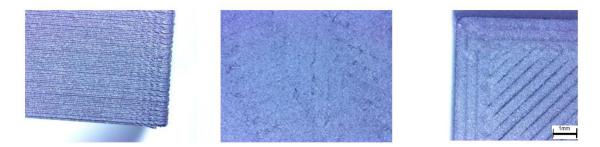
Left: The layers in Z-direction makes an uneven surface Middle: After grinding the internal printing patterns and gaps are still visible Right: Printing pattern of corner of specimen
